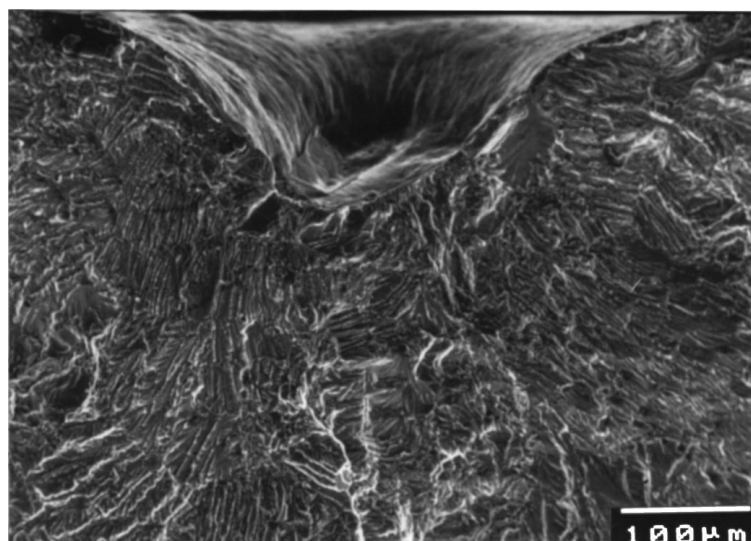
Fatigue fracture surface of a sand-cast specimen showing initiation from a surface hollow.
